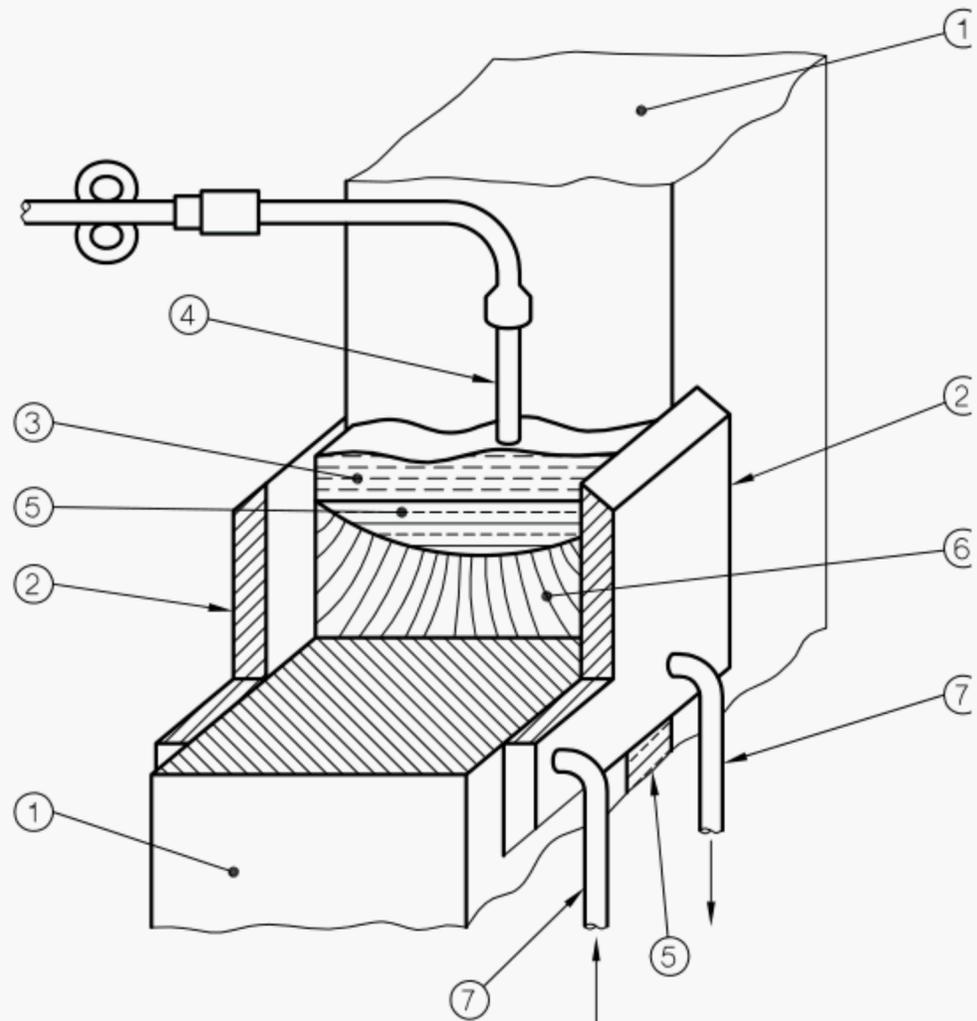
ELECTROSLAG WELDING (ESW)
